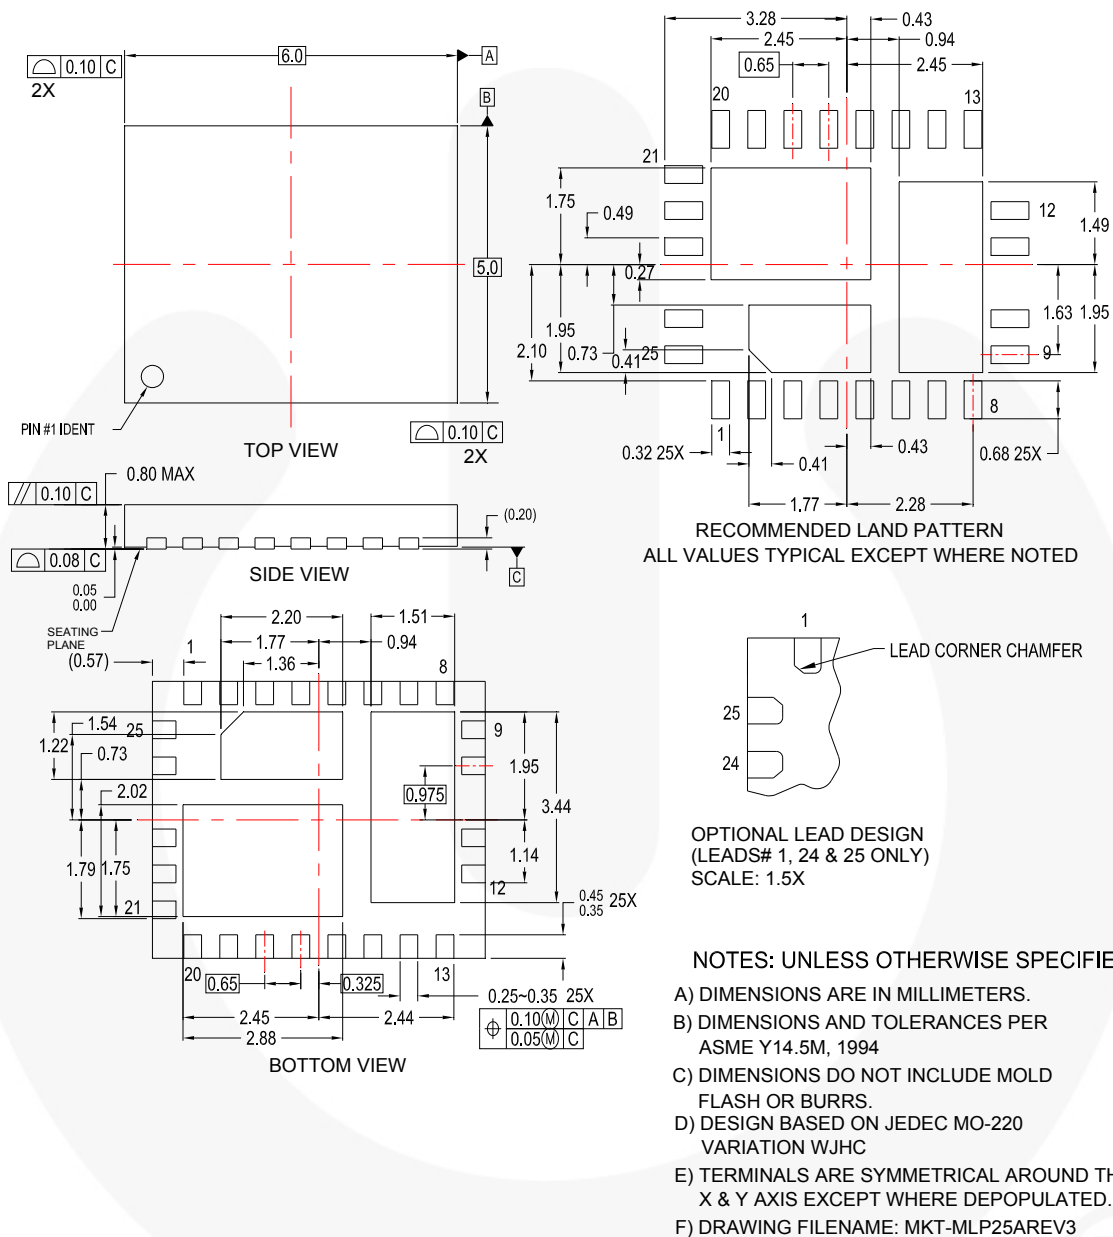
5x6 mm Molded Leadless Package (MLP)
